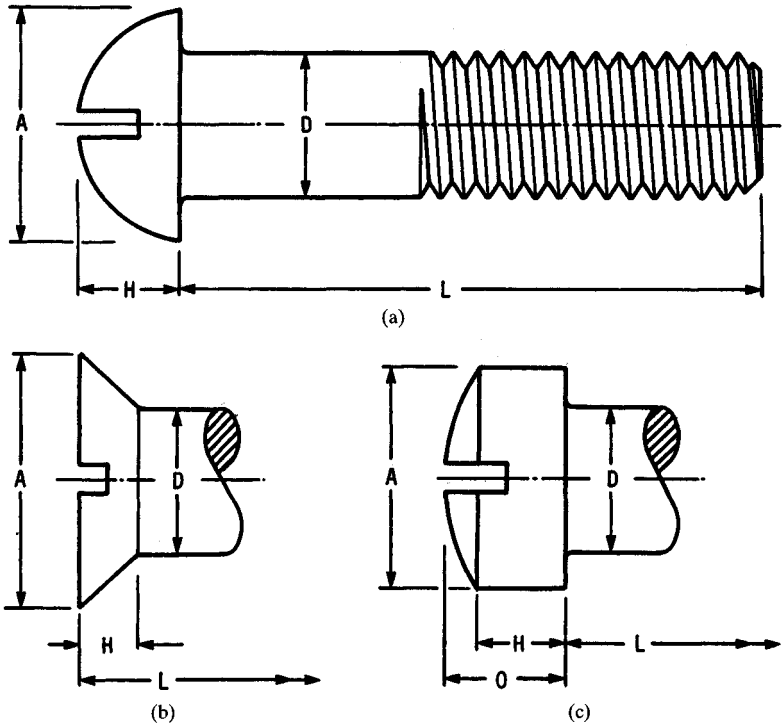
Slotted-head cap screws. (a) Round head; (b) flat countersunk head; (c) fillister head.
